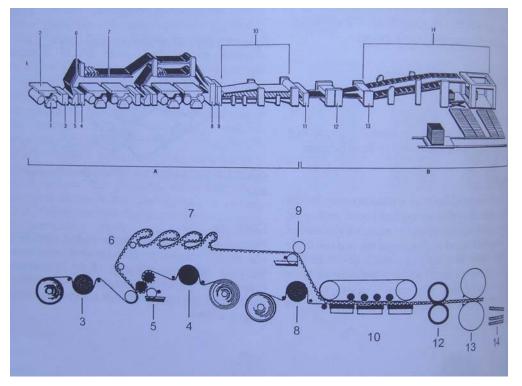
Corrugator. A – wet end; B – dry end; 1 - Mill roll stand; 2 – Splicer 3 – Liner preheater; 4 – Preconditioner; 5 – Single facer; 6 – Inclined conveyor; 7 – Bridge; 8 – Preheaters; 9 – Glue machine; 10 – Double facer; 11 – Rotary shear; 12 – Slitter-scorer; 13 – Cut-off knife; 14 – Take-off devices; [2]
